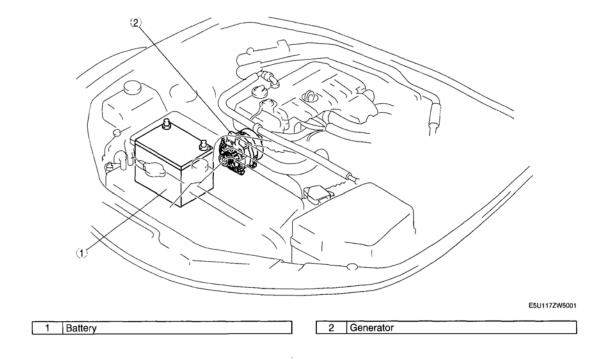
Identifying Location Of Charging System Components Courtesy of MAZDA MOTORS CORP.
